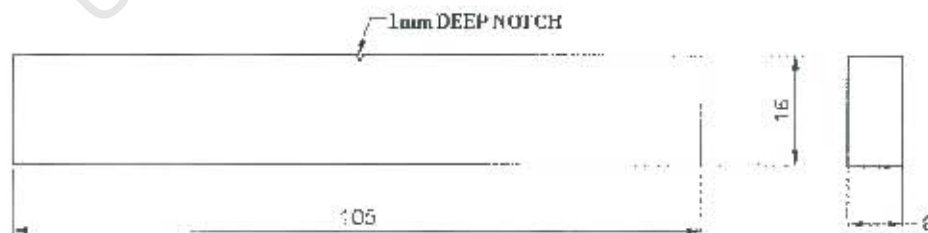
(a): Dimension for the fracture toughness SENB specimen for the Al7075 T6.
